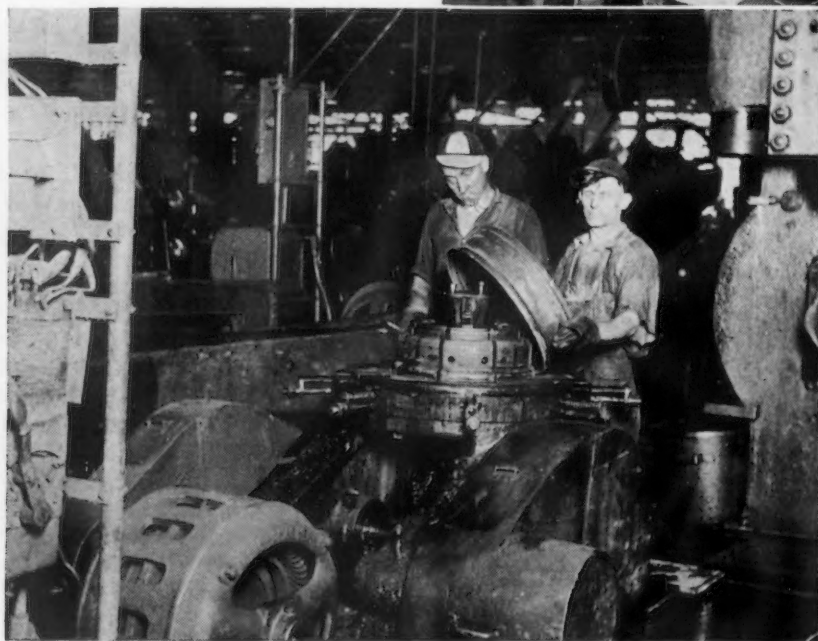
After being coined the rims are expanded slightly in this machine, which is capable of exerting pressures up to 200 tons.
